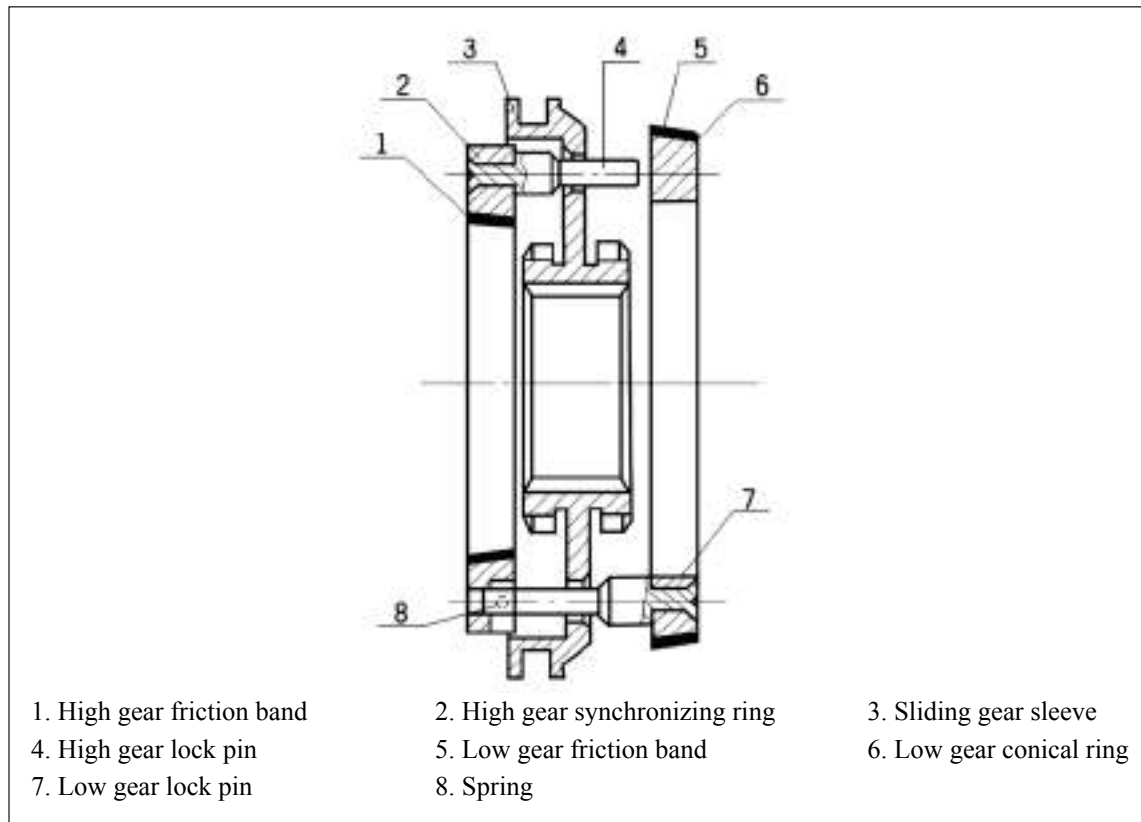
Synchronizer Assembly of Auxiliary Transmission
